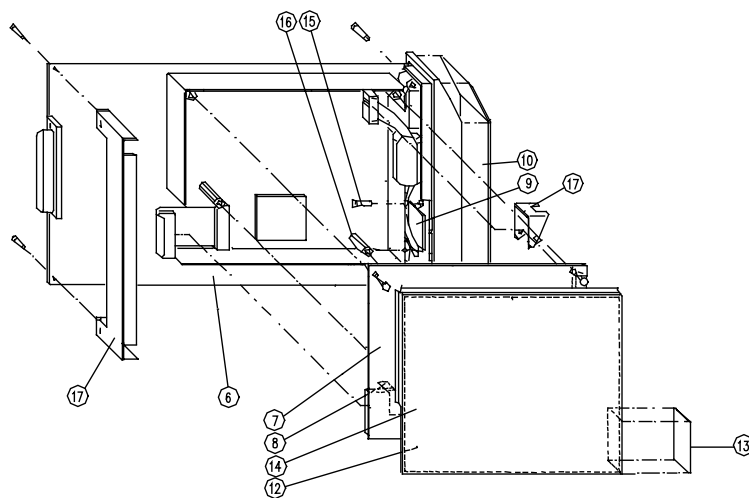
Exploded view of M-NSAT Rev. 00, 01, 02, 03
